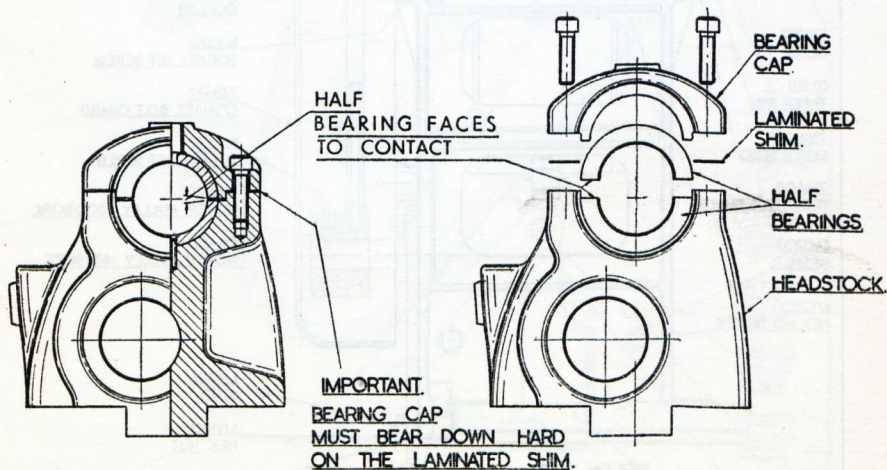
Showing Method of Adjusting ML7 Lathe Headstock Bearings.
